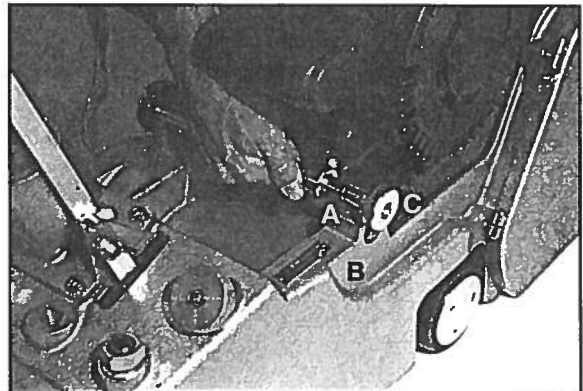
A. Motor mount bar B. Motor mount grooves C. Knurled nut #82.
